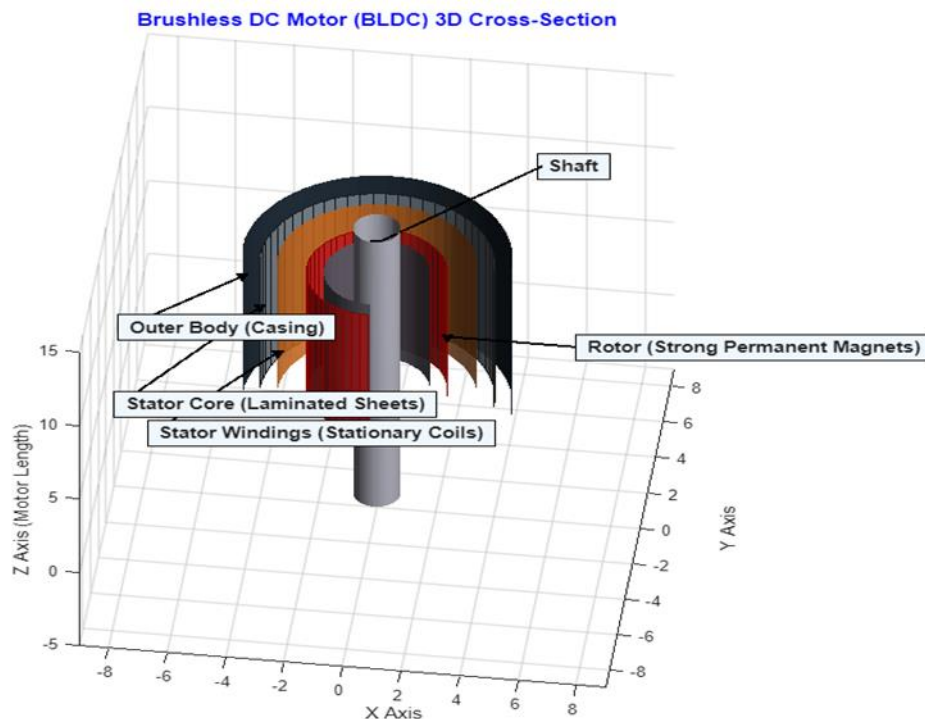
Three-dimensional cross-sectional view of a brushless DC (BLDC) motor, showing the shaft, the outer casing, the rotor with permanent magnets, the laminated stator core, and the stationary stator windings. [Source: Generated by the author using MATLAB]
